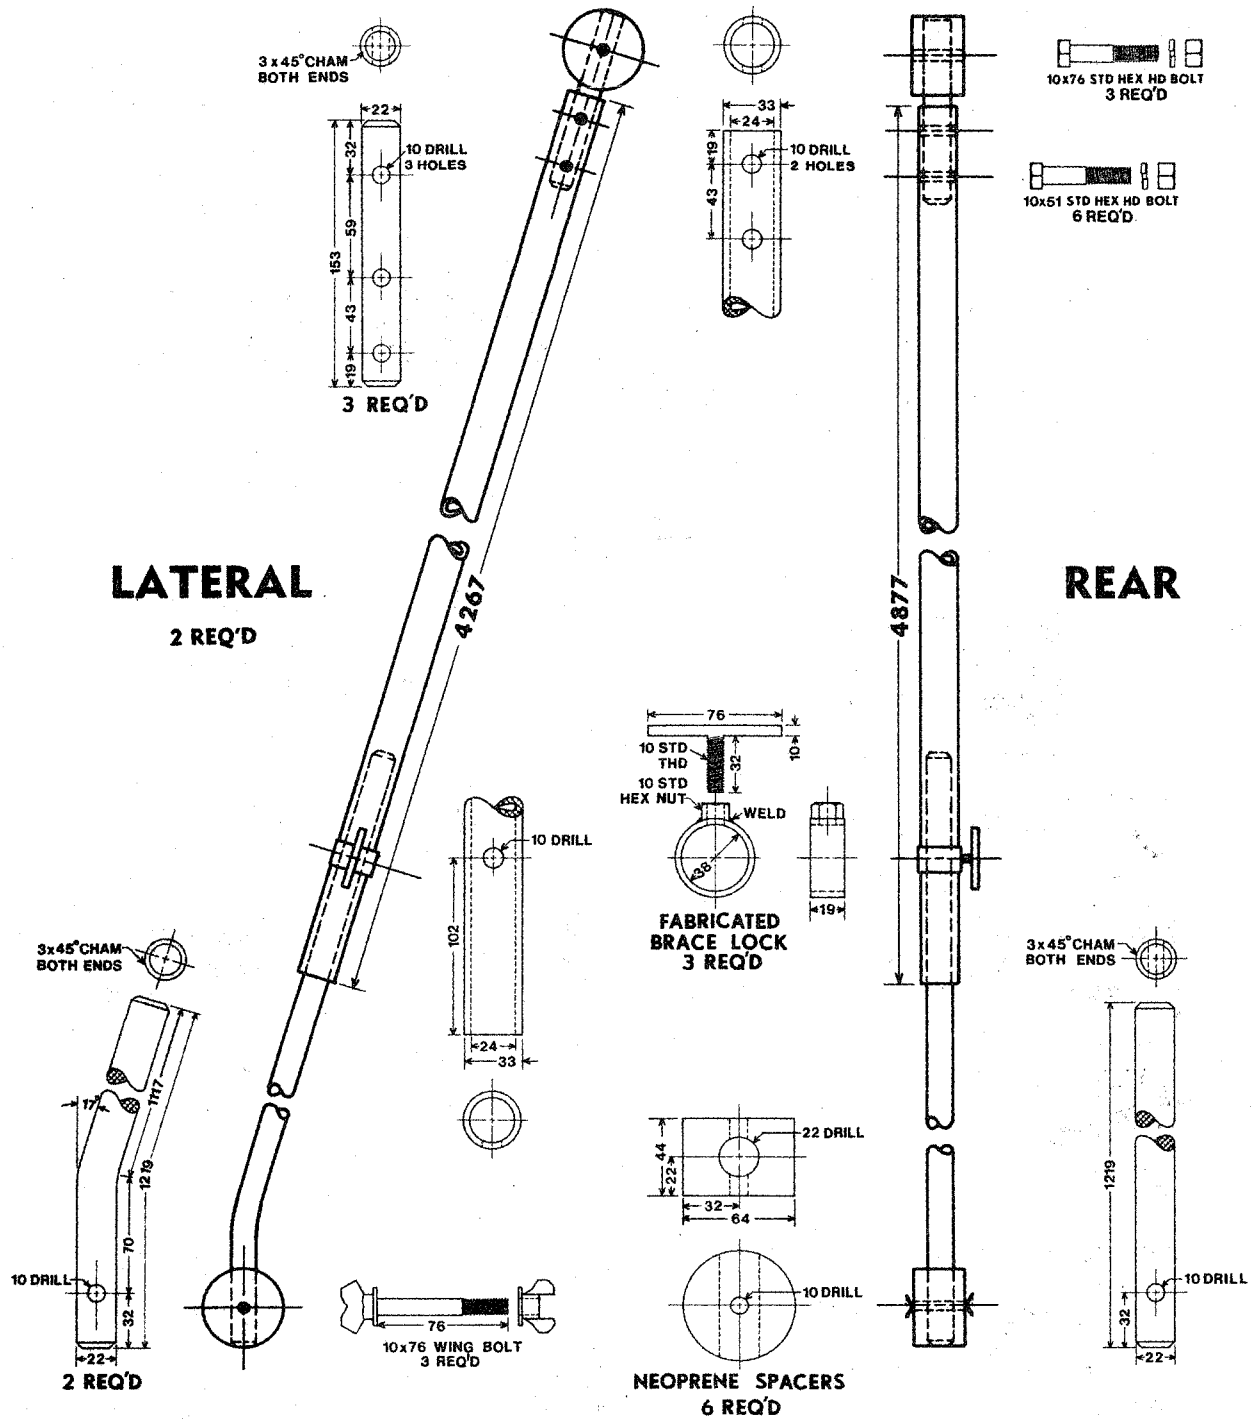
Fabrication plans for the mast braces, constructed from aluminum alloy 6061-T6. Dimensions are in millimeters.
